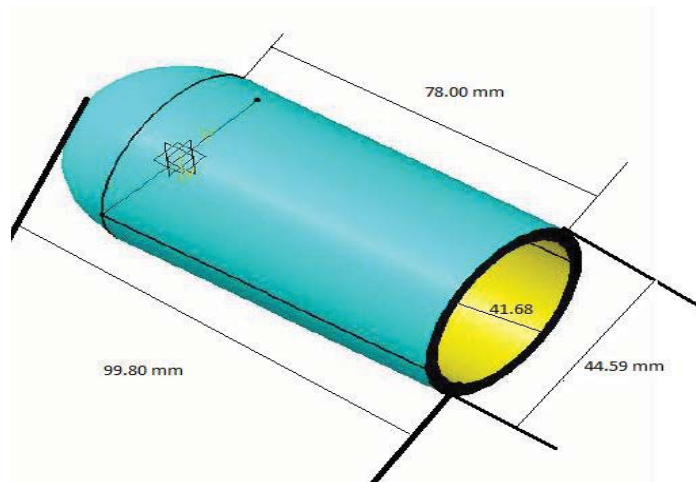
Isometric view of the mould to be used in centrifugal casting technique.
